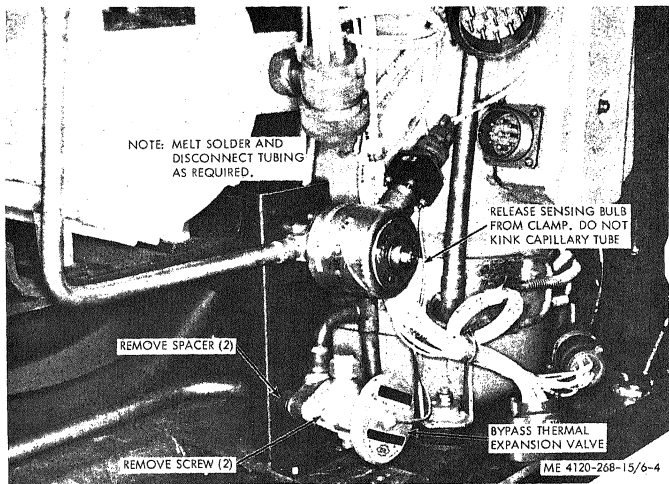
Bypass thermal expansion valve, removal and installation.
